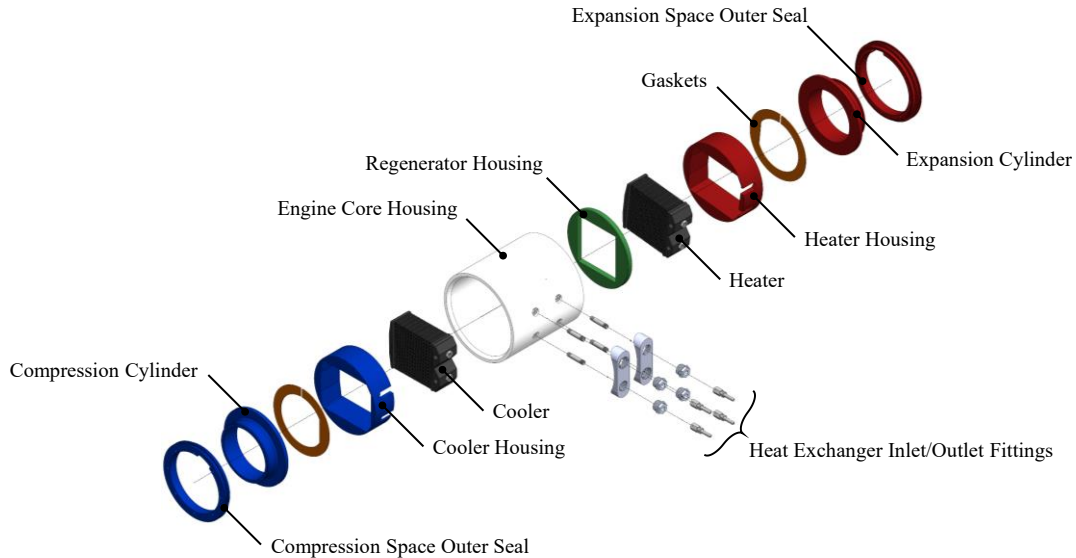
Exploded View of the OPA MK III Engine Body Solid Model
